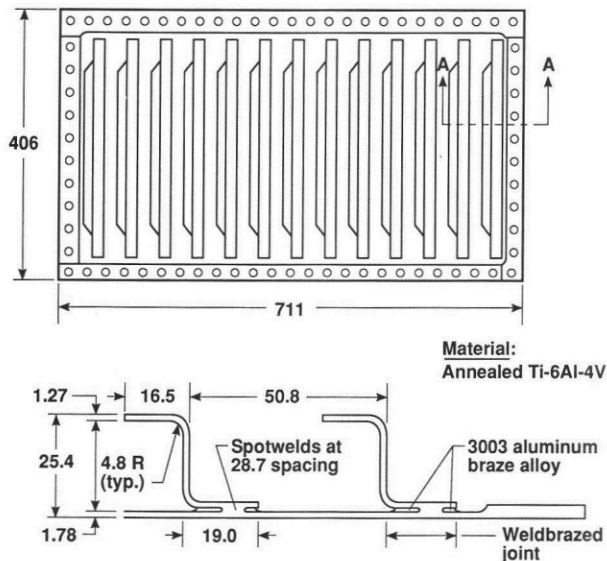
Configuration of weldbrazed titanium skin-stiffener panels. Dimensions are given in millimeters.
